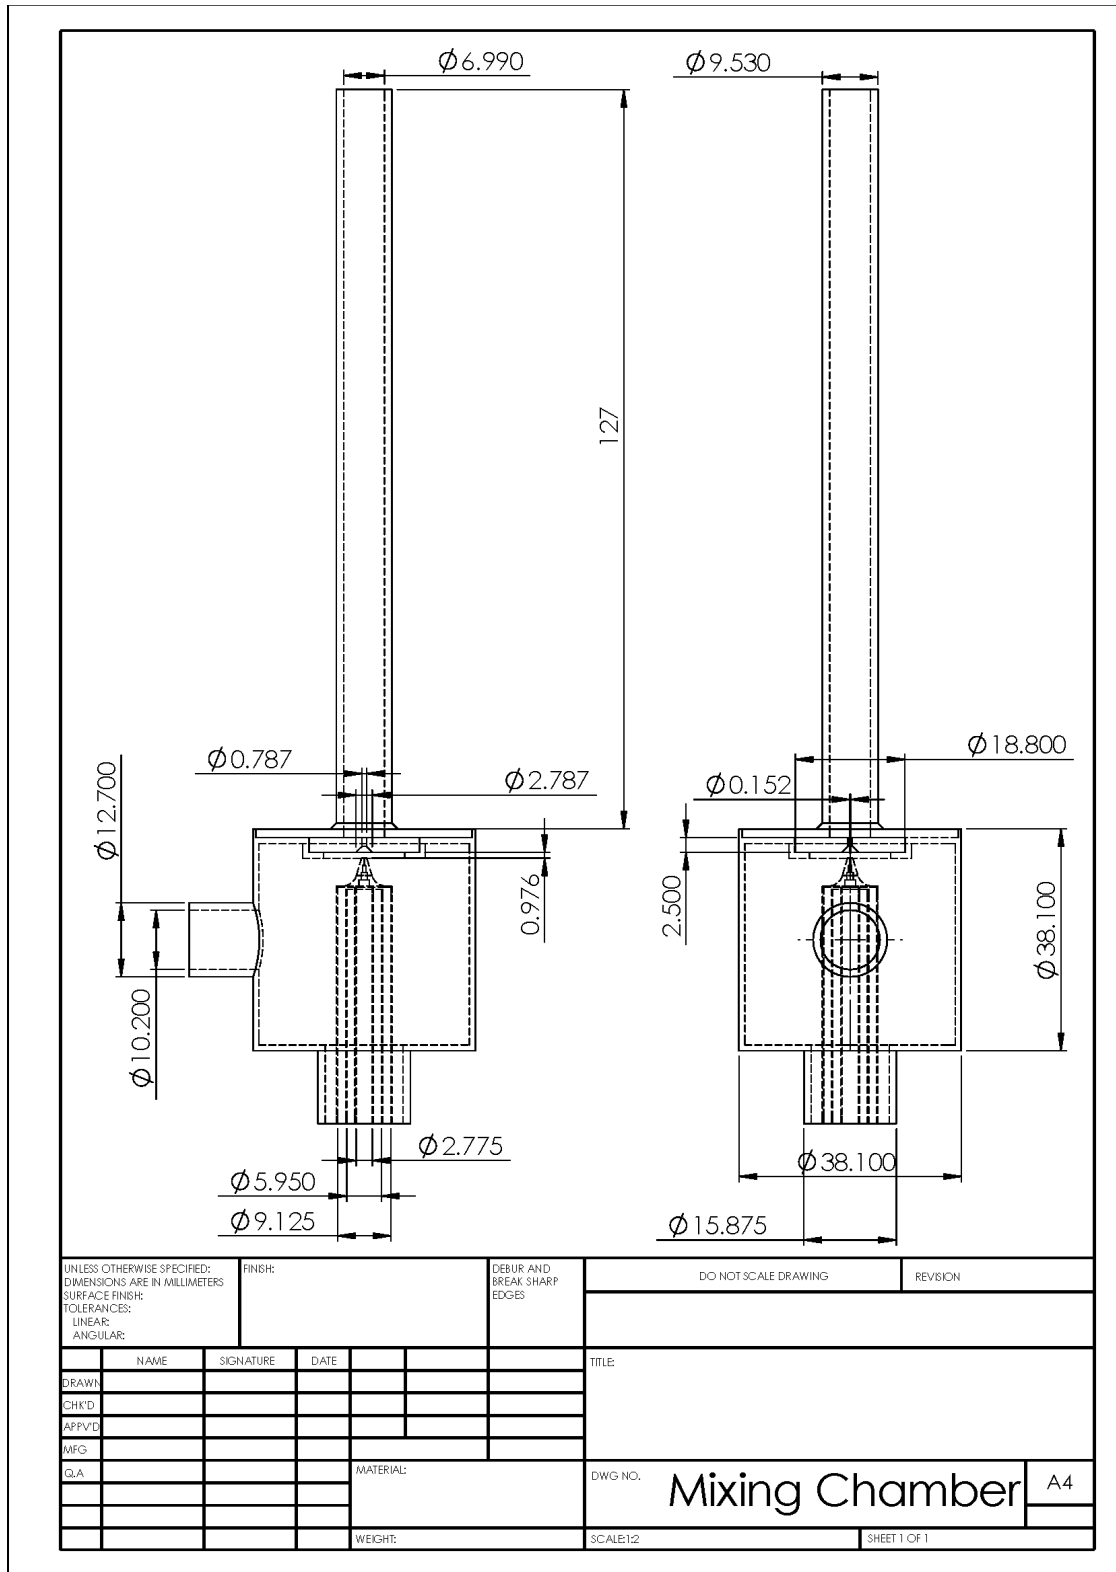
CAD design of Plane Jet Atomizer Assembly.
